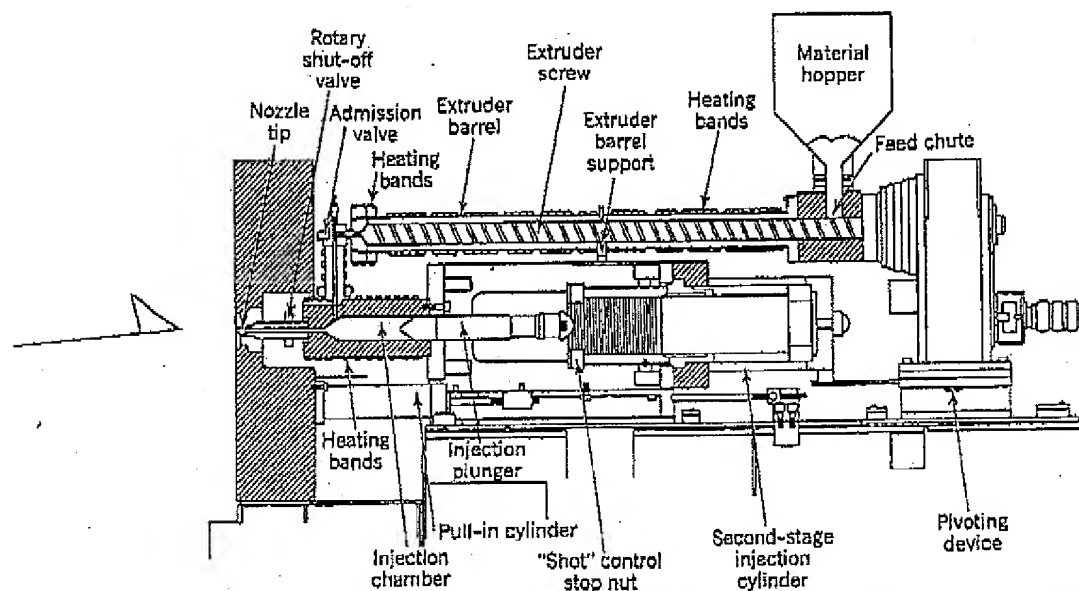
Two-stage screw-plunger machine. Courtesy of HPM Division of Koehring Company.
